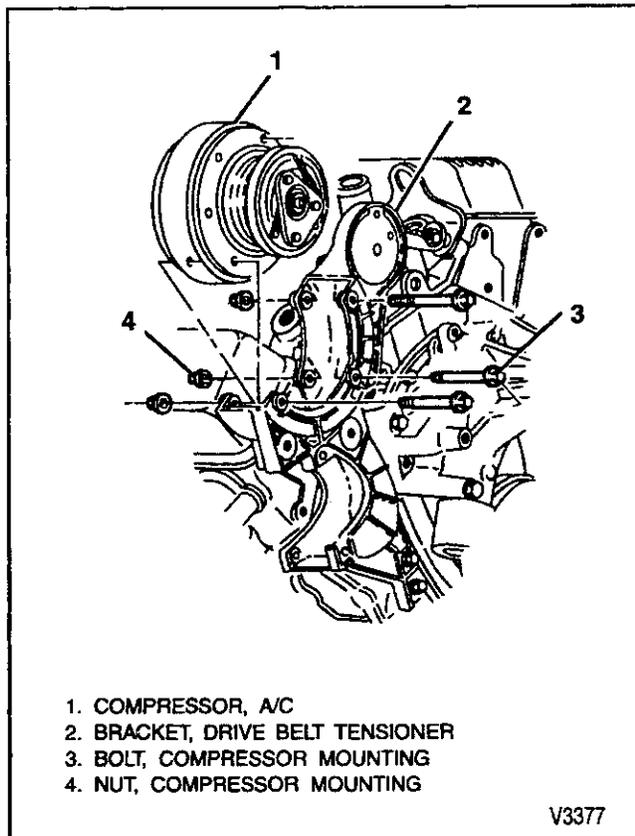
Compressor Mounting (4.3L, 5.0L, and 5.7L Engines)
